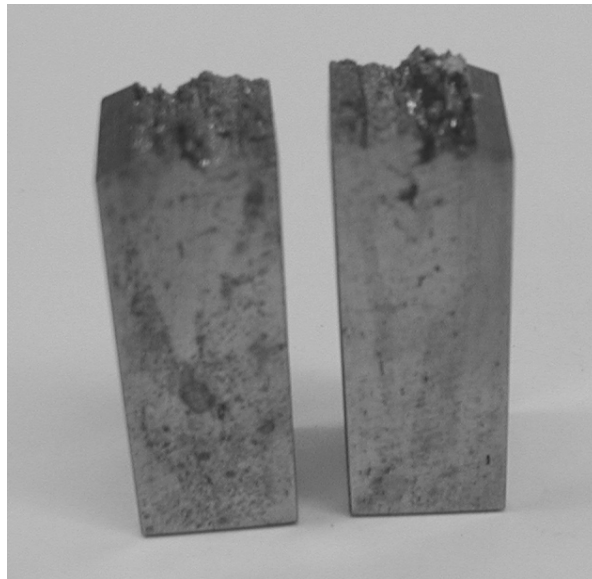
Slip Plane Fracture of Charpy Impact Specimen (T Type)
